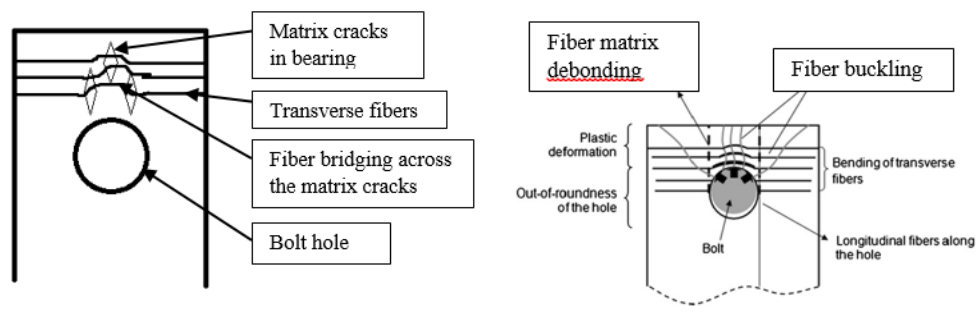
Fiber Bridging and buckling for bearing failure
